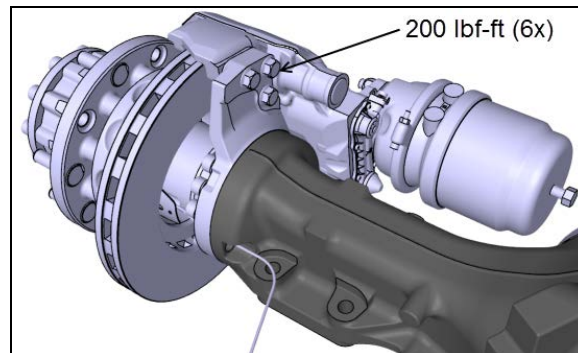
CALIPER CARRIER MOUNTING BOLTS TORQUE SPECIFICATION - ZF A132 DRIVE AXLE
